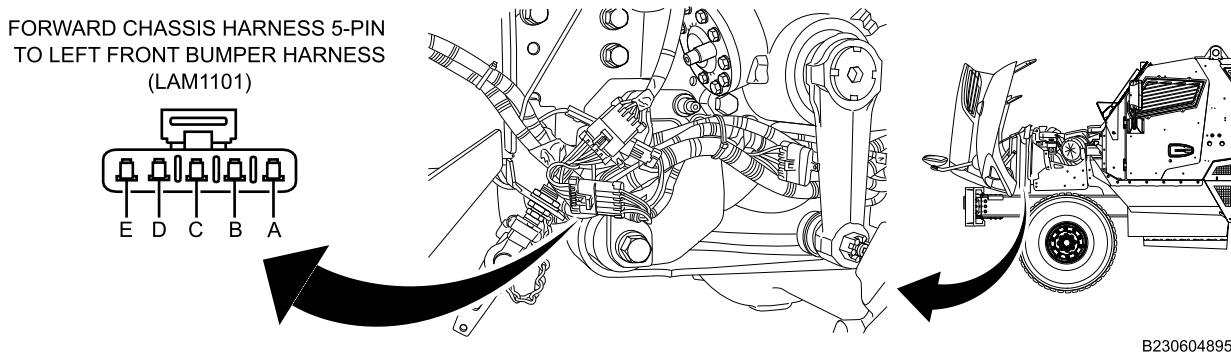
Left Front Bumper/Front Chassis Connector Near Front Spring Shackle.
